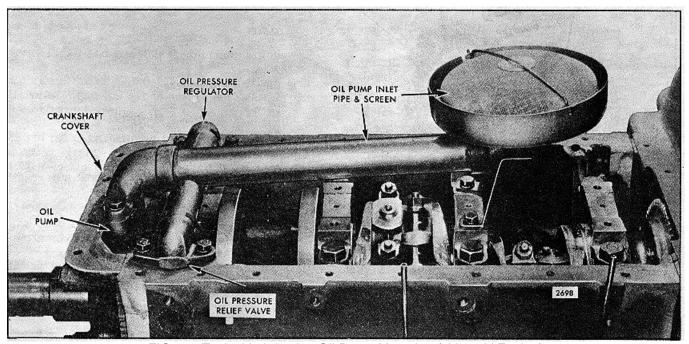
Typical Lubricating Oil Pump Mounting (6V or 8V Engine)
